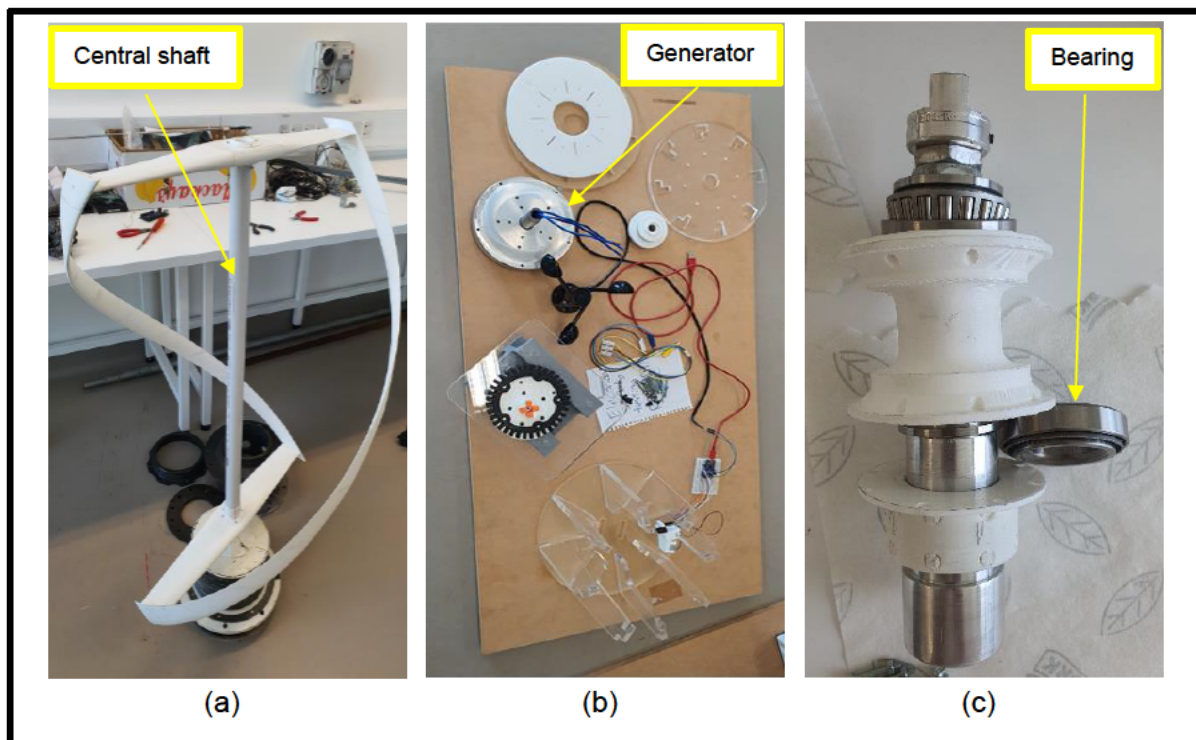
(a) Central shaft; (b) PMSG 12 poles generator; (c) Bearing
